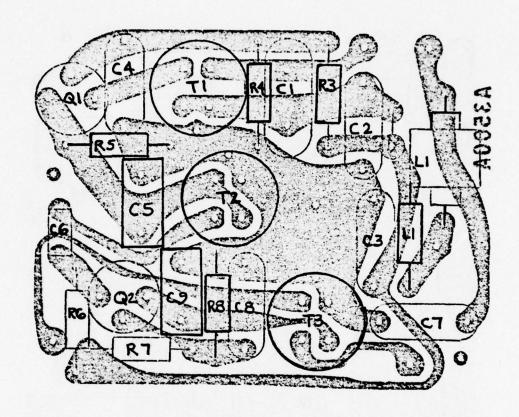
P.C. BOARD LAYOUT FOR THE A3500A CRS THIRD IF AMPLIFIER AND LIMITER ASSEMBLY
